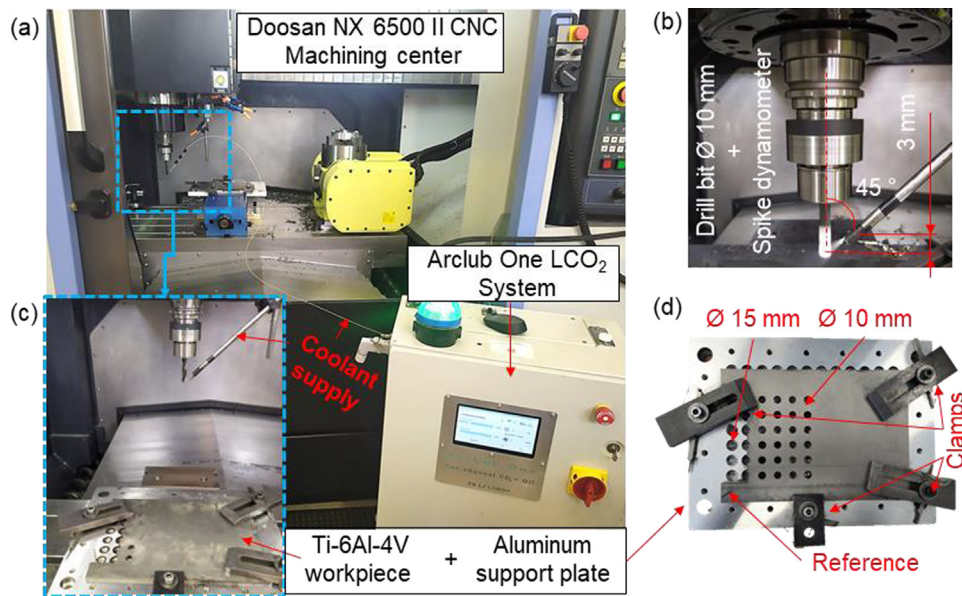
Employed experimental set-up: (a) General overview of the CNC machining center and Arclub One LCO₂ system; (b) Detailed view of the set-up; (c) Detail of the tool, coolant supply line and dynamometer; (d) Detail of the workpiece clamping system with the aluminum support plate.
